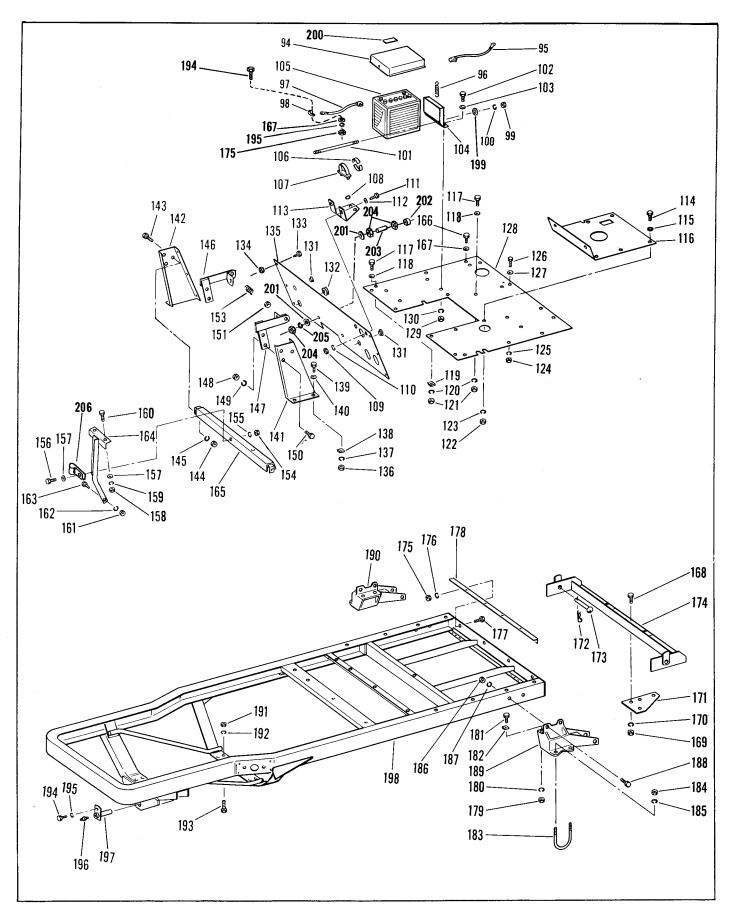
B. Frame, Toe Board, Floor Plate and Battery
